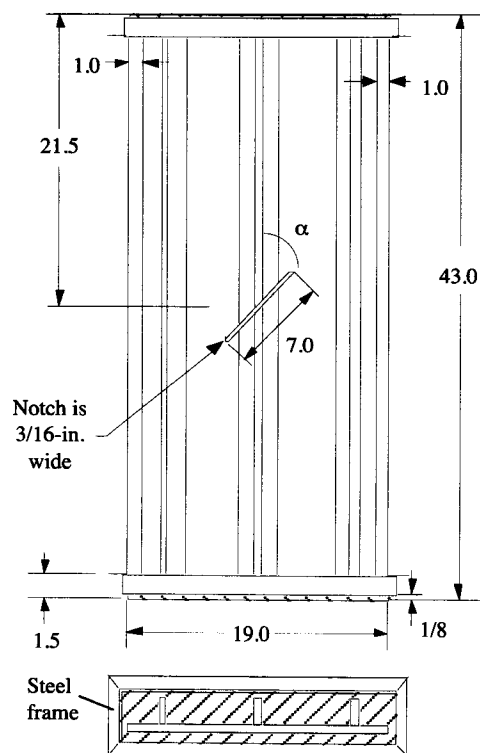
Schematic of the stitched, graphite-epoxy panel with a centered, machined notch through the center stringer (dimensions are in inches).
